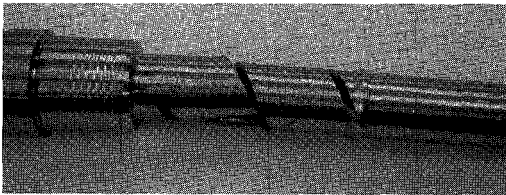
The shape of spindle insert fractured by fatigue test
